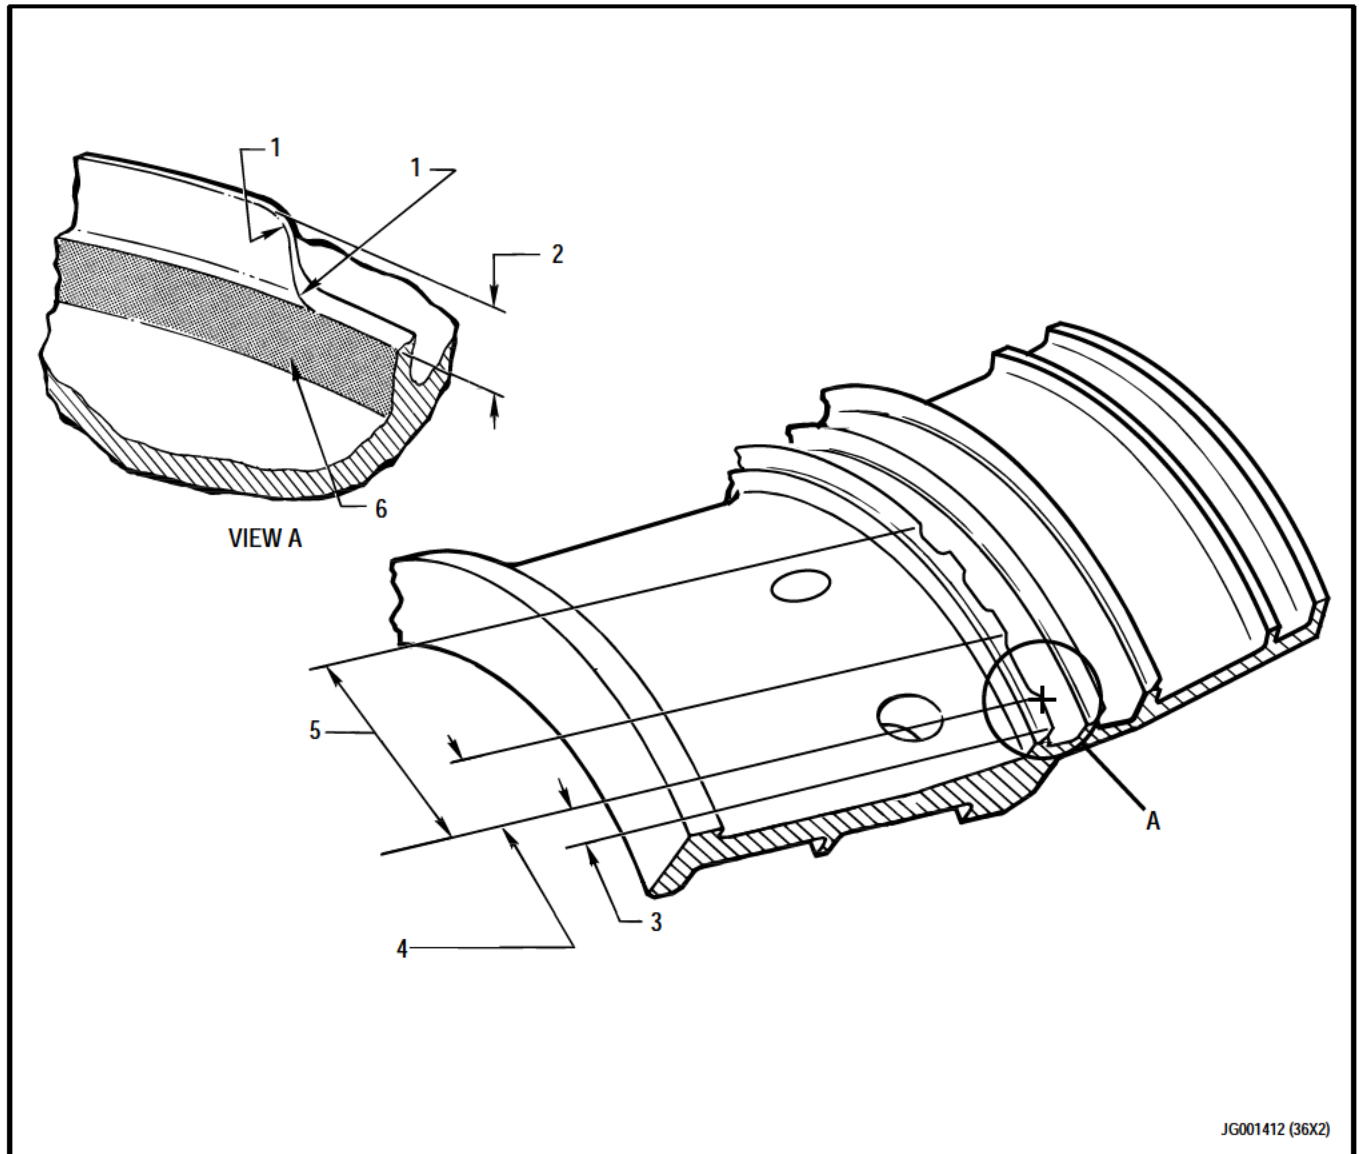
No. 3 Bearing Air Seal - Blend Repair
